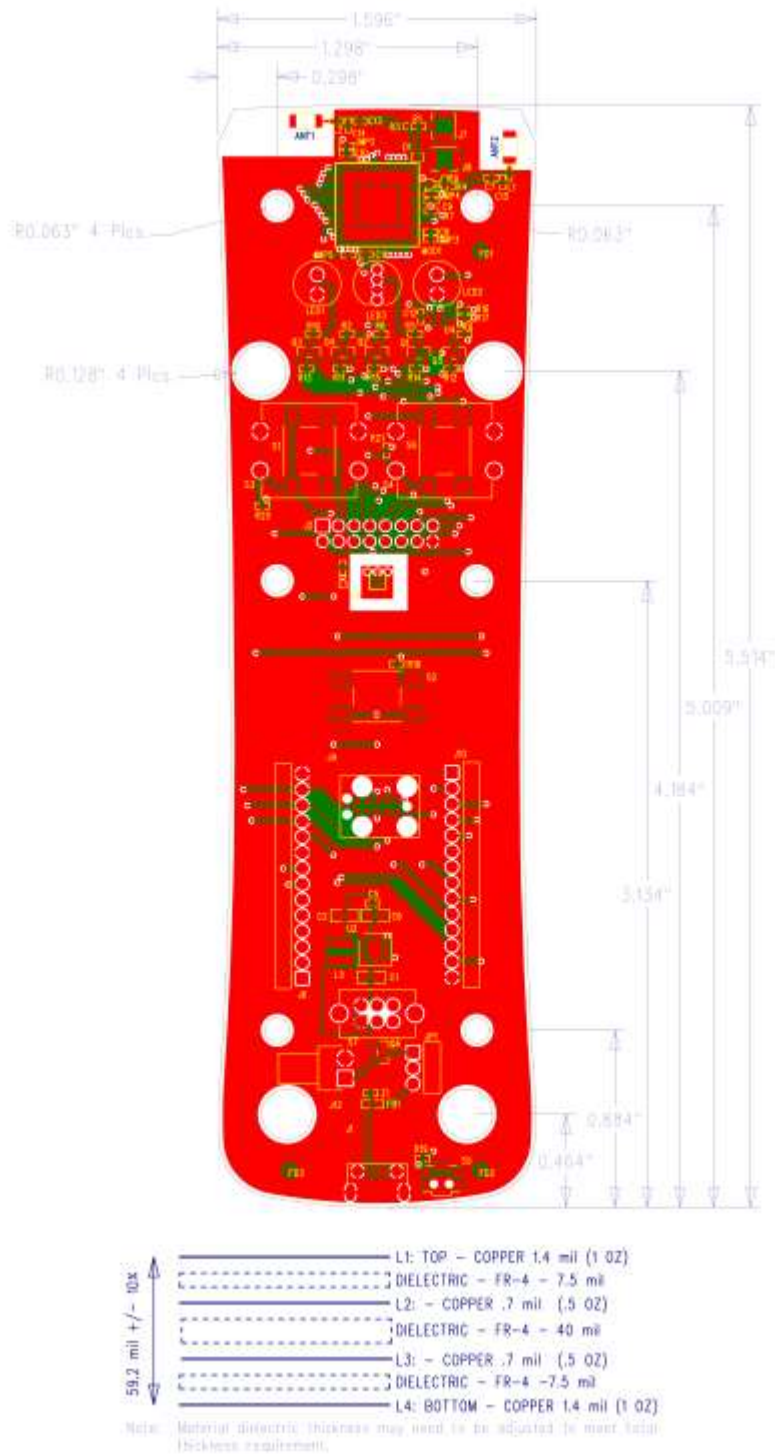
4-Layer Chip Antenna Trace Design PCB Layout
